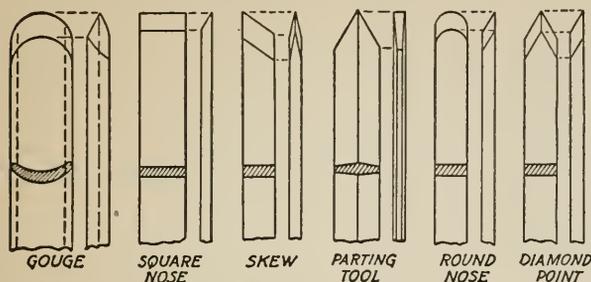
A set of turning tools for the beginner. They must be supplemented by calipers, dividers, rule, oilstone, and slip stone.
